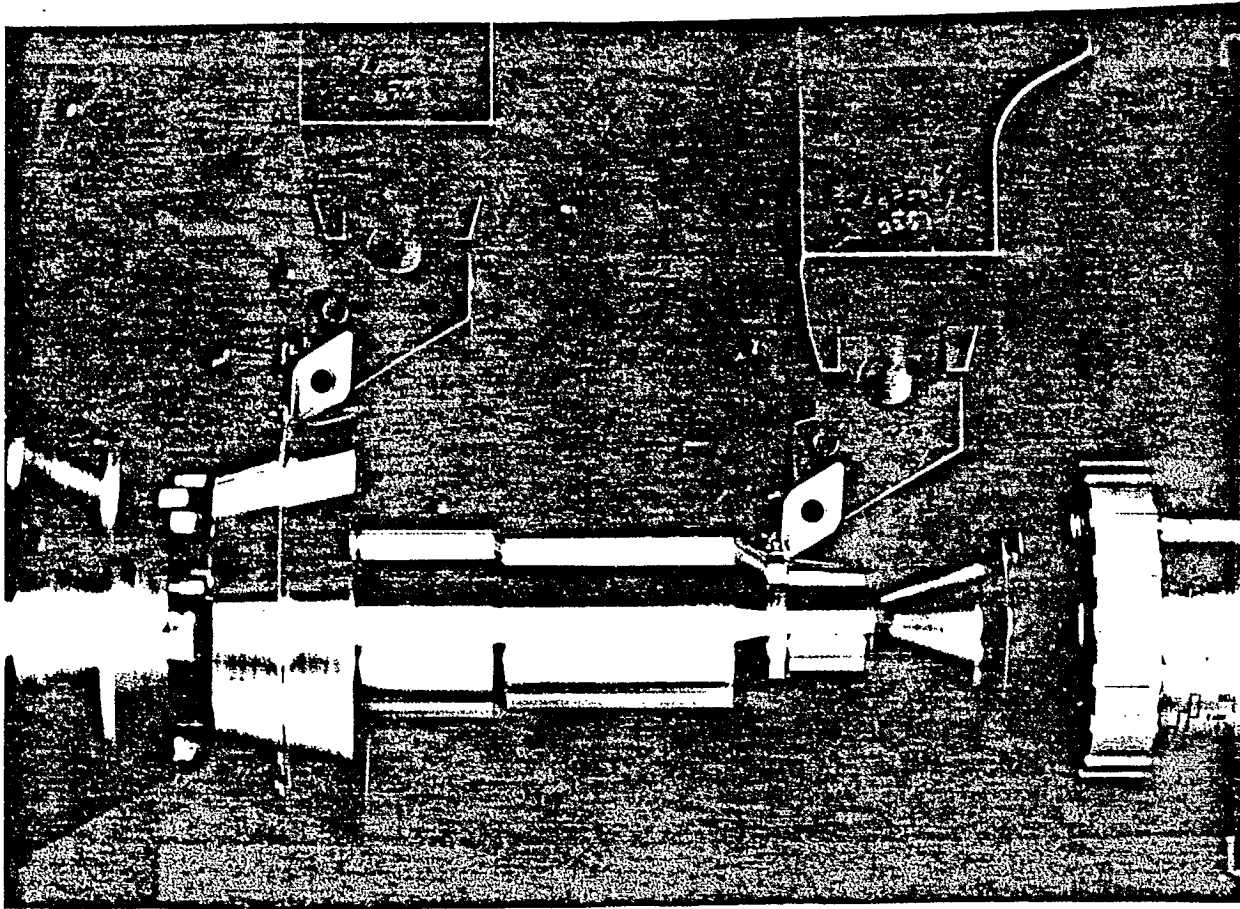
The use of exchangeable Turning Tools and a Face Driver
